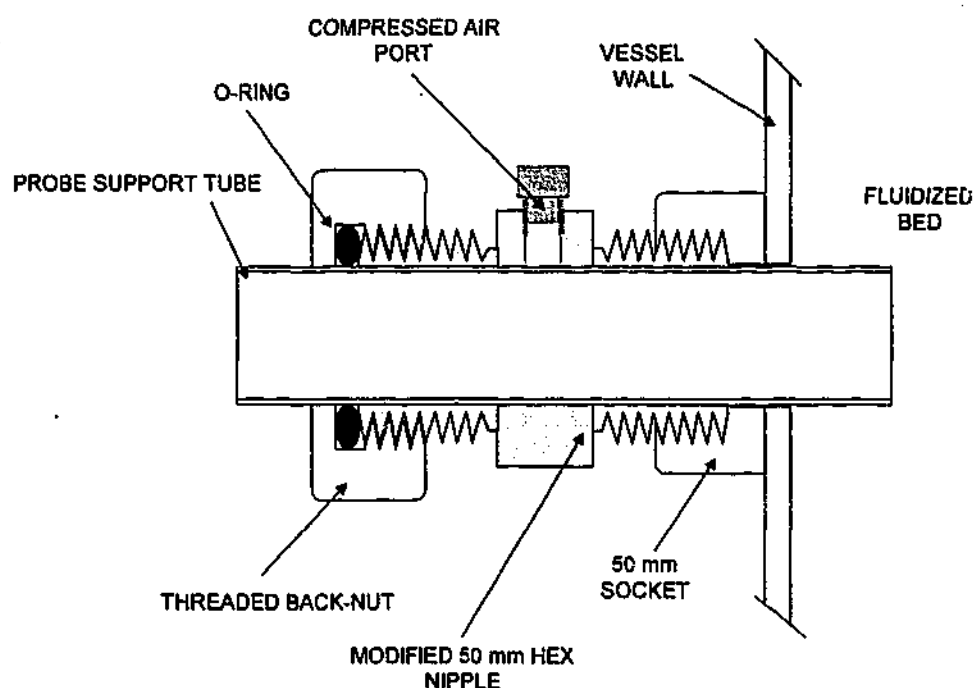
Sectioned view of the sealed support collar design for large probes in the 1560 mm bed. The fitting was sealed with an O-ring; as it turned out, the tapping point for compressed air was never required for clearing solids from the inside of the fitting.
